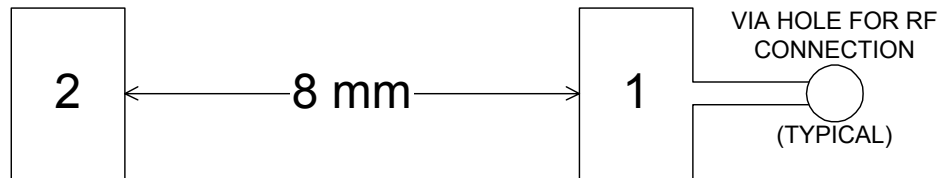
BlueChip™ TYPICAL PCB SOLDER PAD LAYOUT
